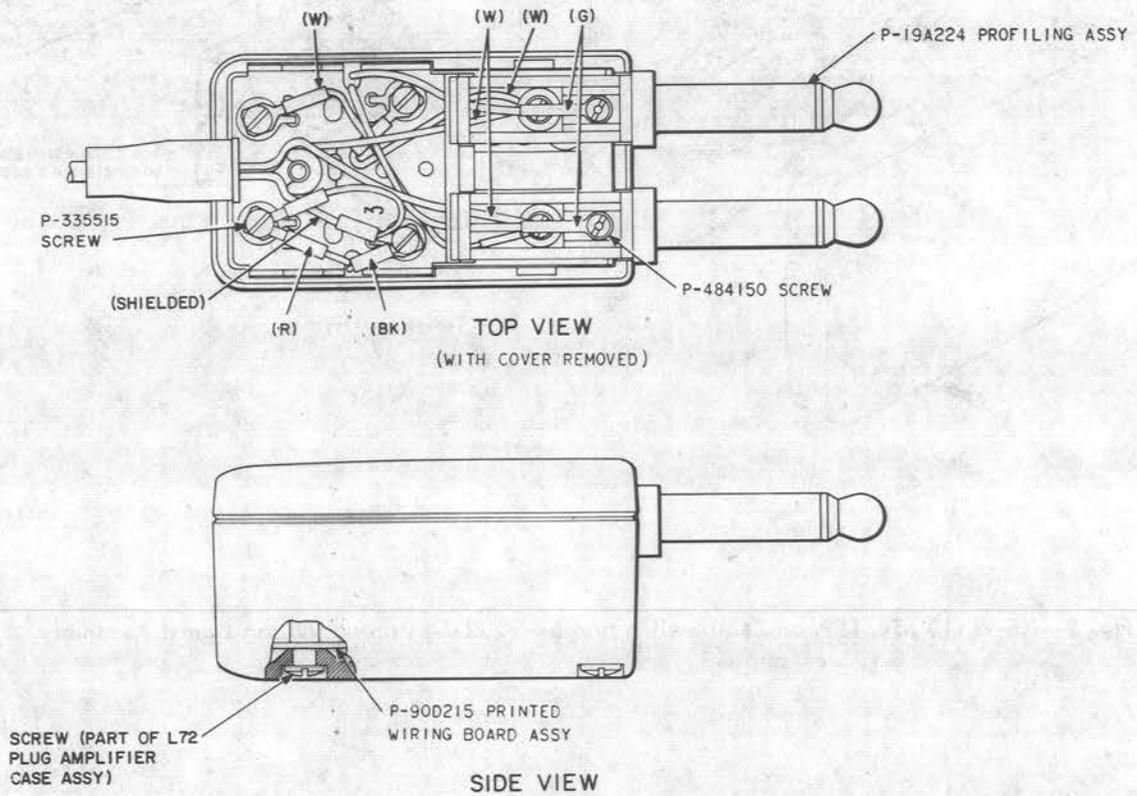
P-90D215 Printed Wiring Board Assembly and Associated Parts
